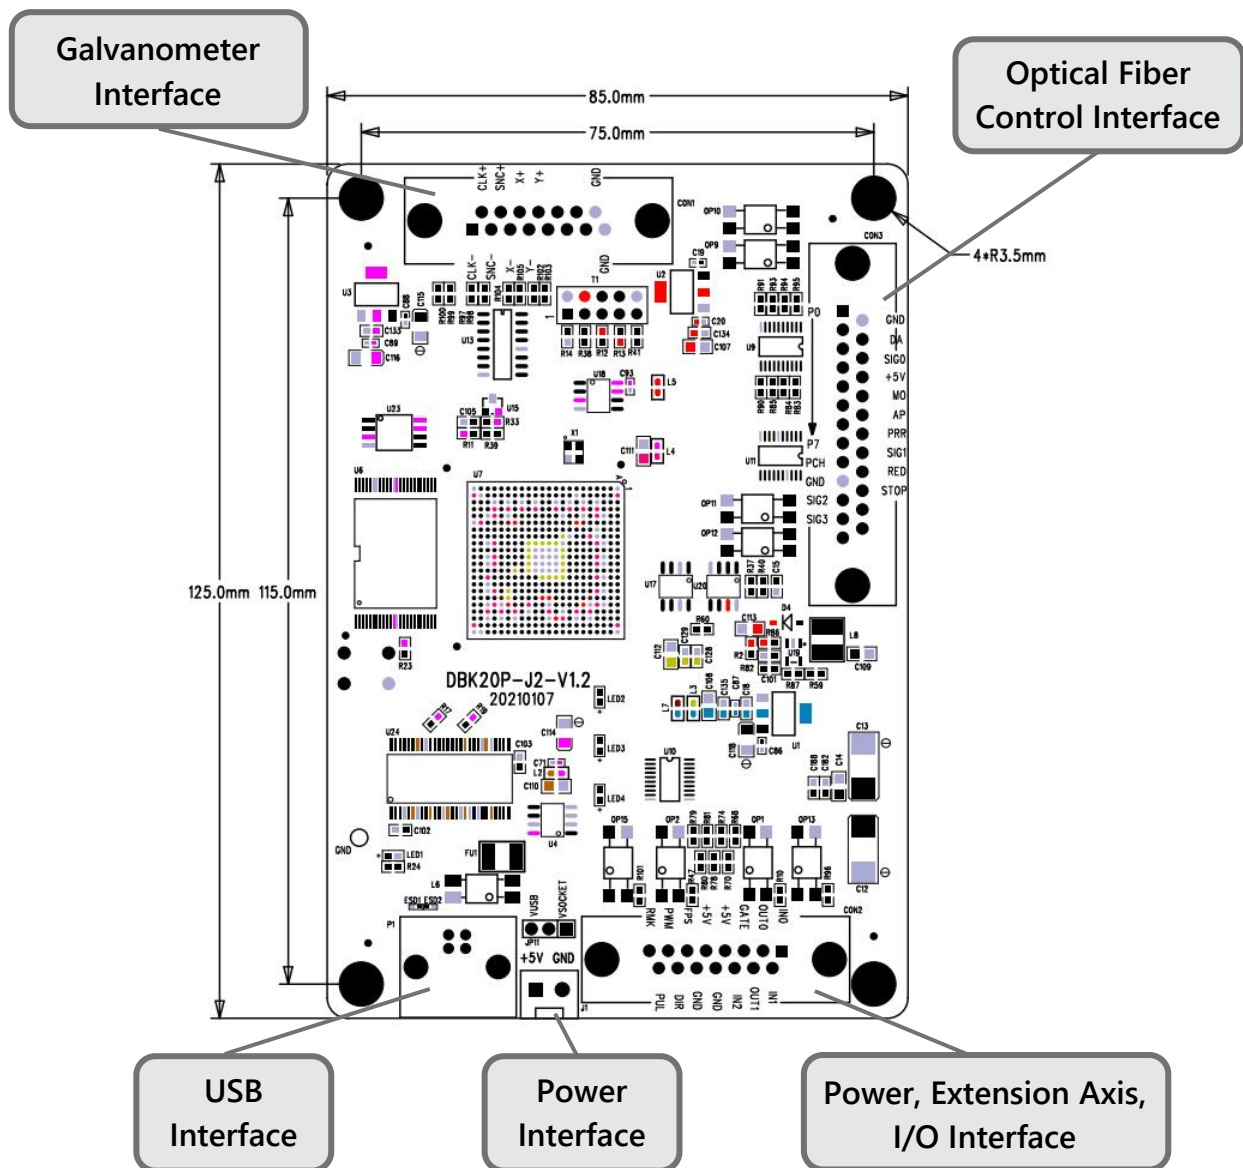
External Dimensions of DBK2JP Laser Control Card
